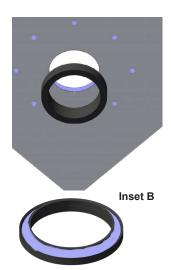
Inside Tank Bolt, Gasket and Flange Installation
